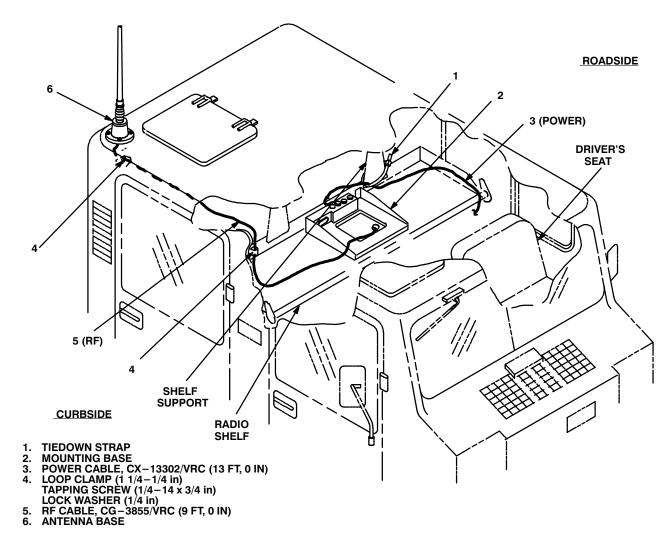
(3). RF Cable Installation: M923a, M1066, and M1067
